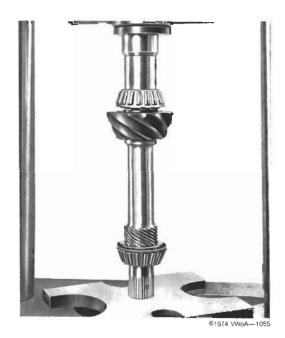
Tapered-roller bearing inner race being installed on drive pinion. The press tool mus not contact the roller cage.
